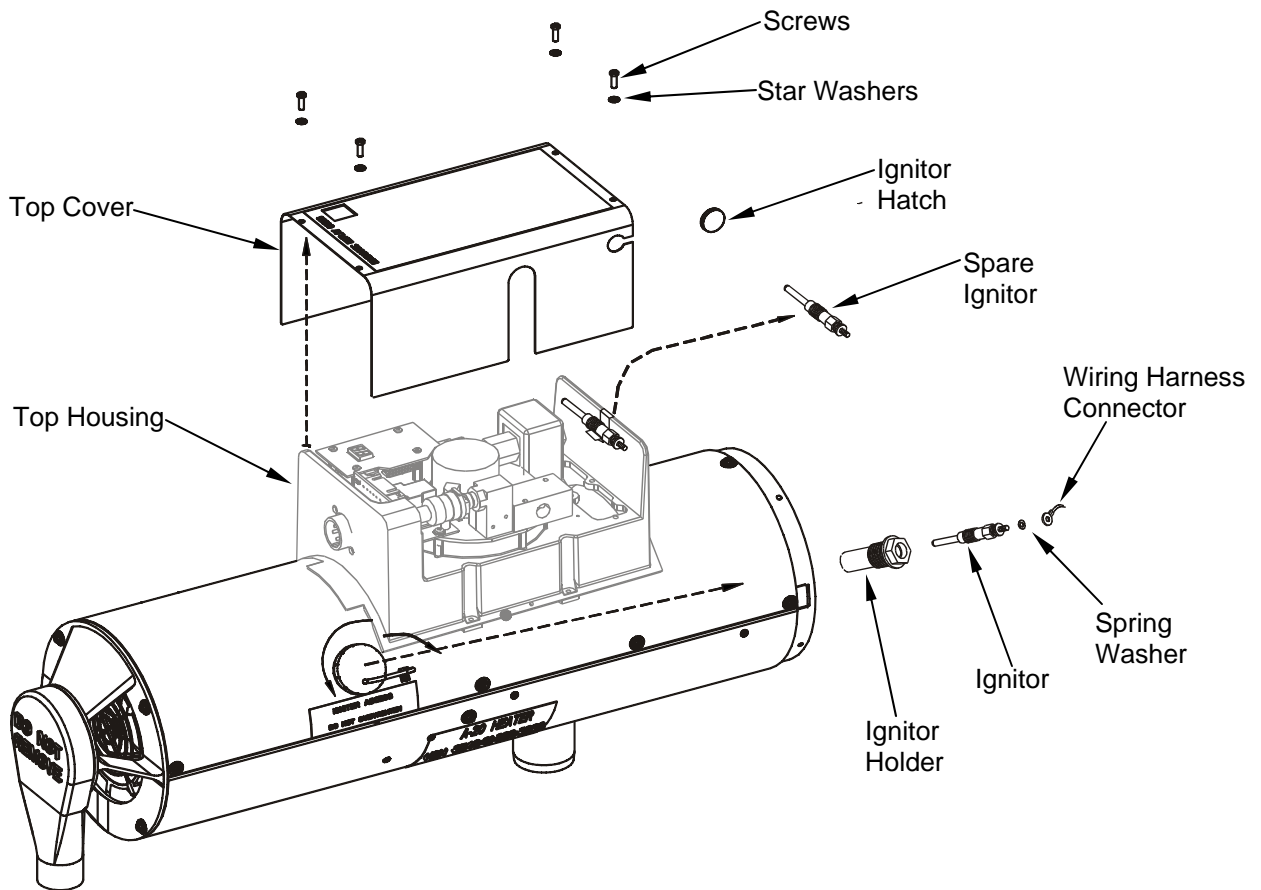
Ignitor & Ignitor Holder Inspection
